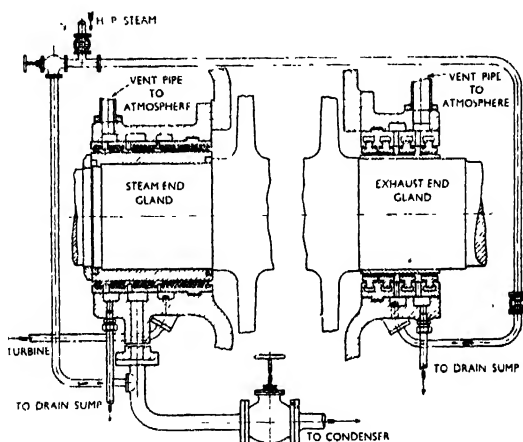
Sectional Arrangement of Shaft Glands—Labyrinth type.
